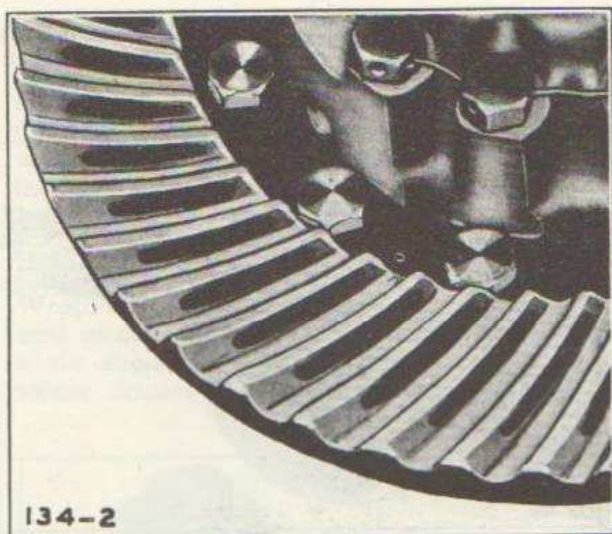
Imprint Indicating Proper Gear Tooth Contact
